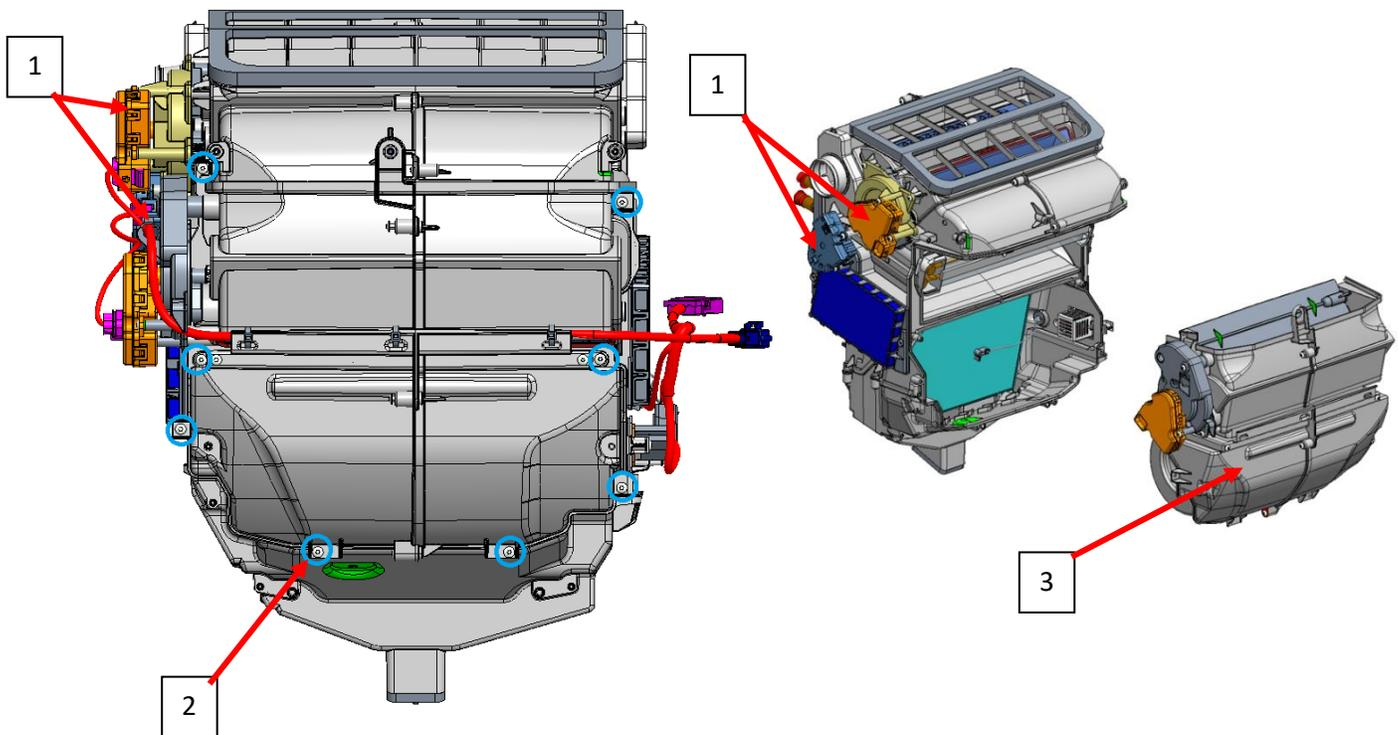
HVAC Unit with Separated Blower Scroll Housing
